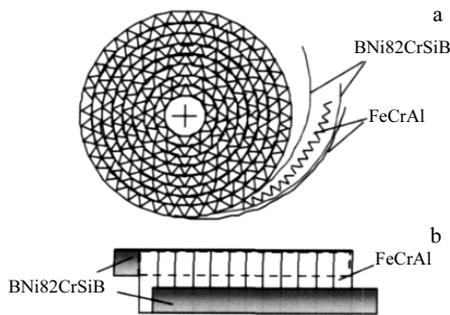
Schematic diagram of assembling brazing sample: (a) top view and (b) position of the brazing filler metal^[13]
